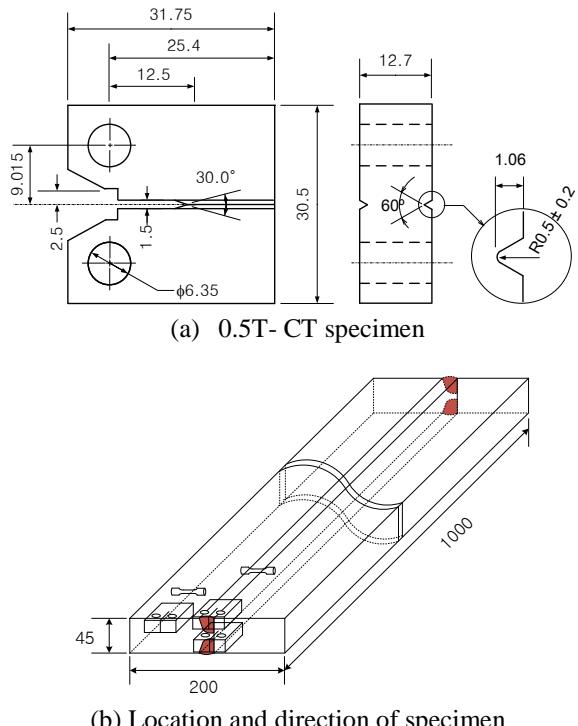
Dimension and location of 0.5T-CT specimen used for cyclic tearing tests
